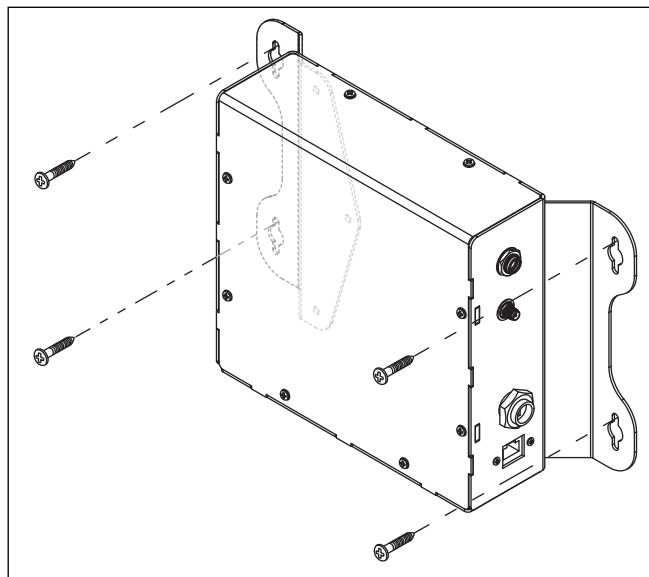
Secure CPU Enclosure Assembly to Mounting Surface
